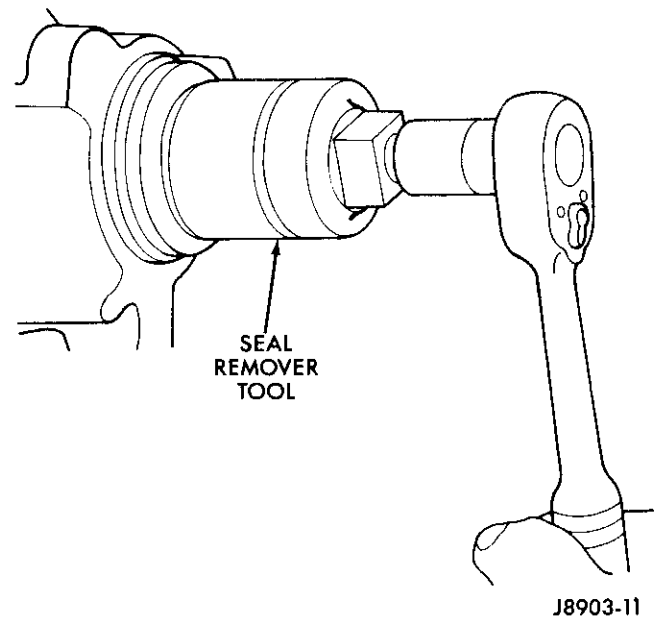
Drive Pinion Gear Shaft Seal Removal
